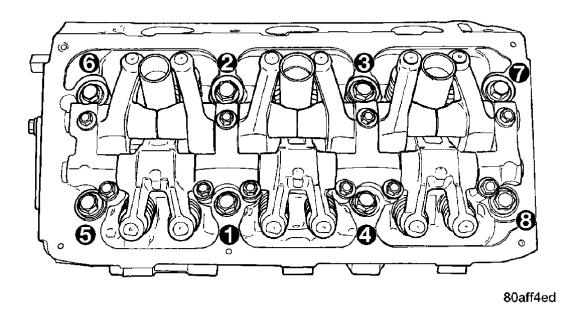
Cylinder Head Bolt Tightening Sequence Courtesy of CHRYSLER LLC
